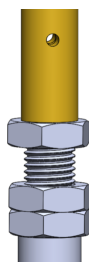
Connection between the swivel shaft and brass T-shaft [9].
